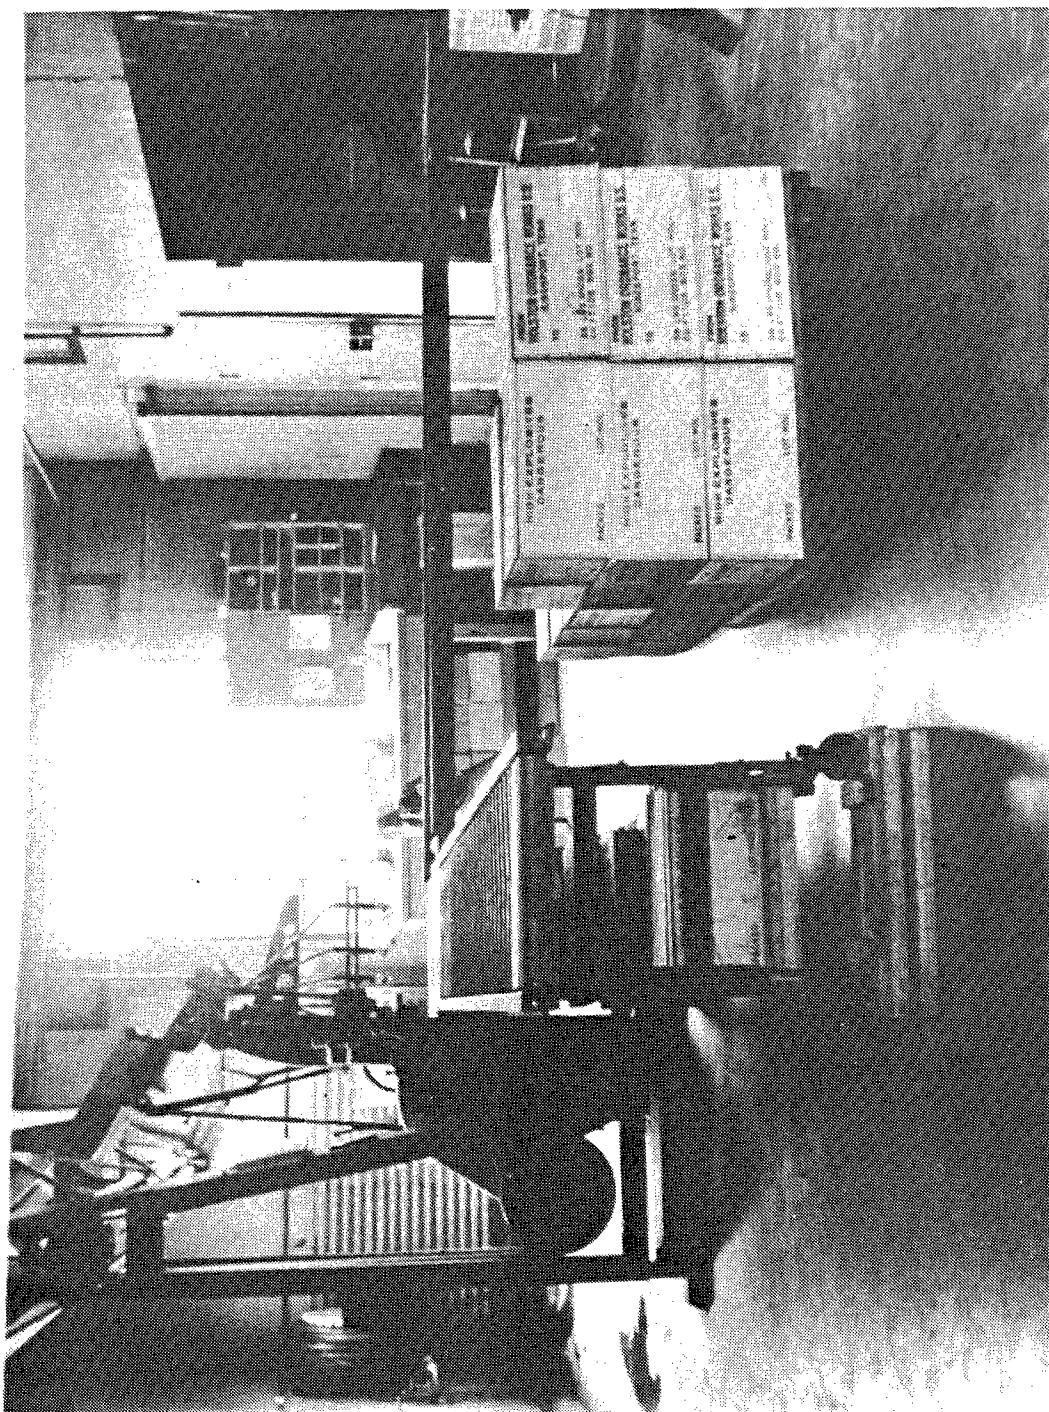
Interior, N Building (courtesy of Holston AAP Photo Set No. 26-B [on file Engineering Vault, Building 26]).
